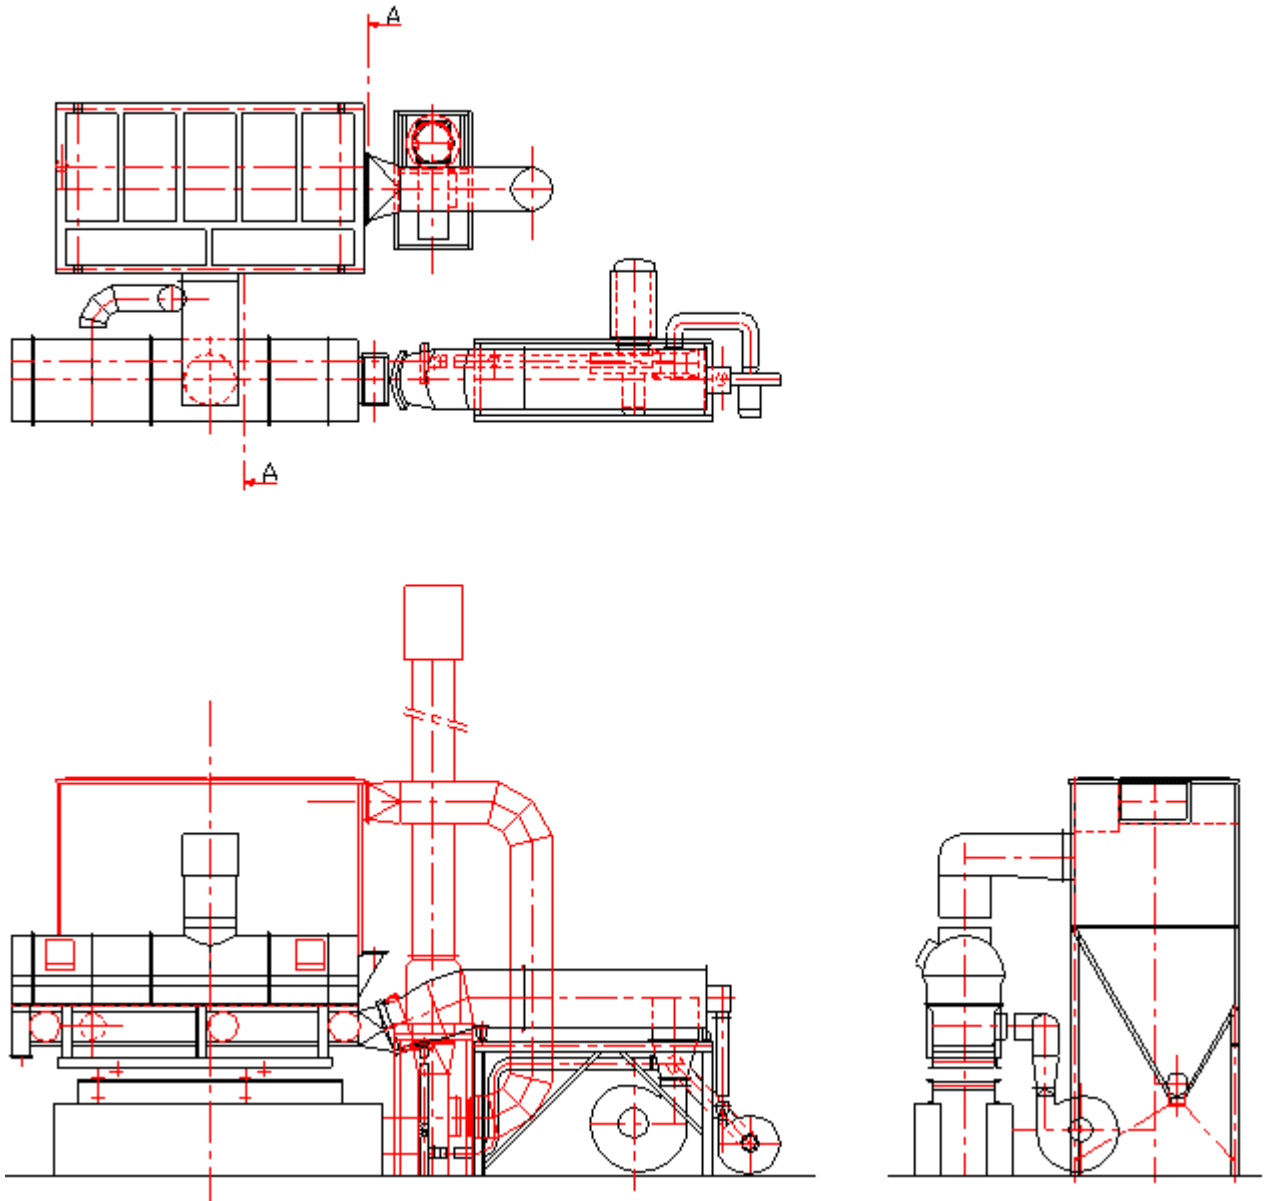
Layout of a dryer/cooler for sand without recirculation of cooler exhaust air.
